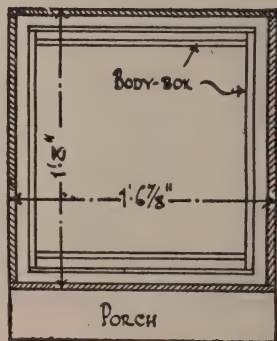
Horizontal Section through Body-box and Outer Walls
